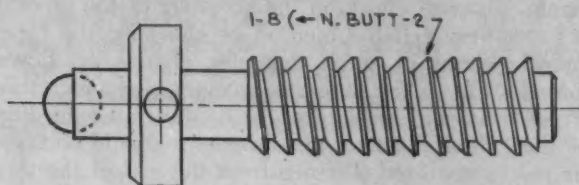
The designation of a buttress thread should indicate which flank is to be the leading flank. Here, the pressure flank is the leading flank.
